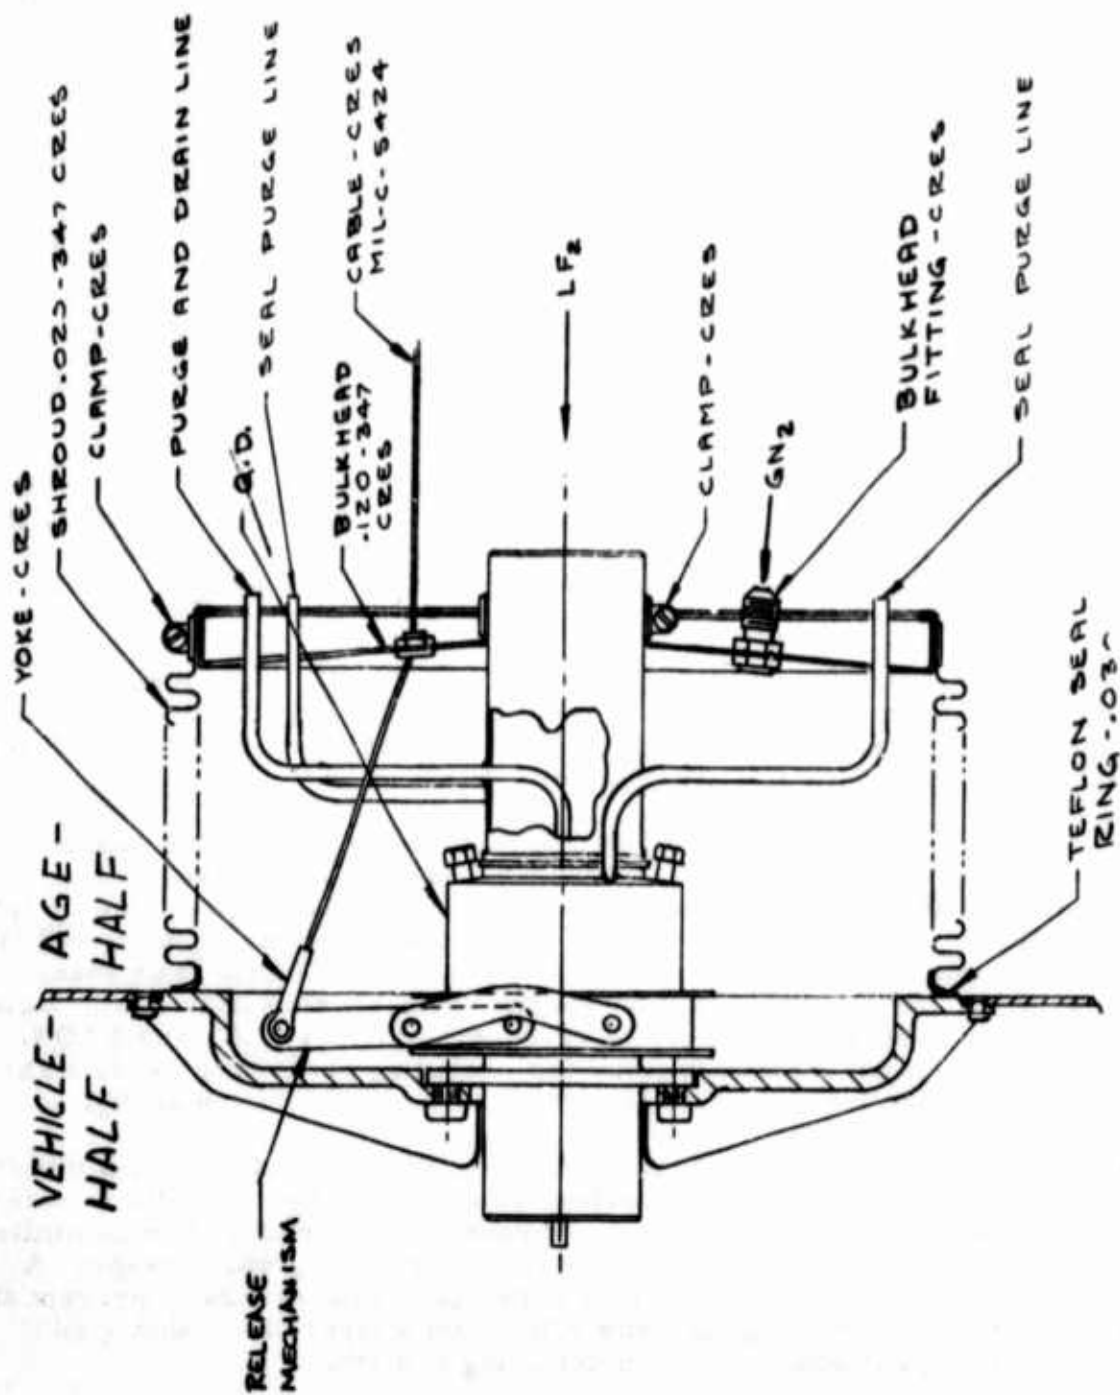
General Arrangement of Shrouded Test QD Coupling
